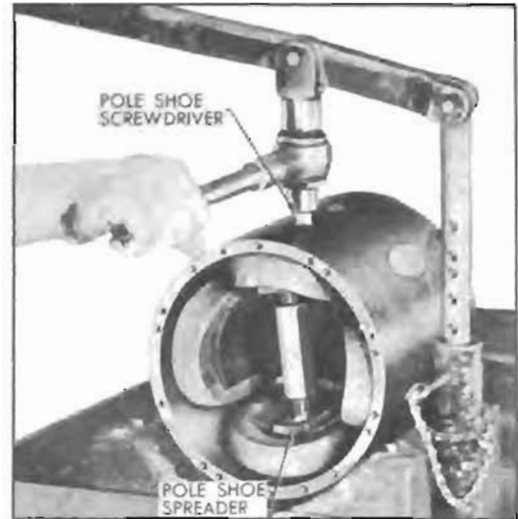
Using Pole Shoe Spreader and Screwdriver
